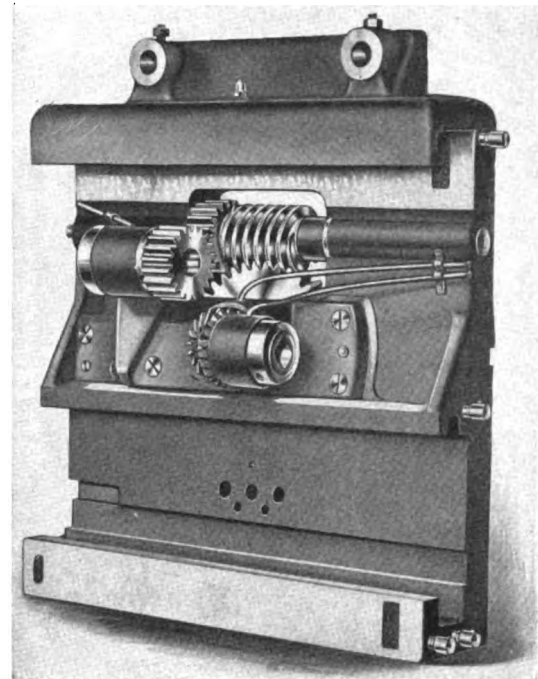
Cross-Rail Saddle Construction, showing Maxi-Power Feed Mechanism
